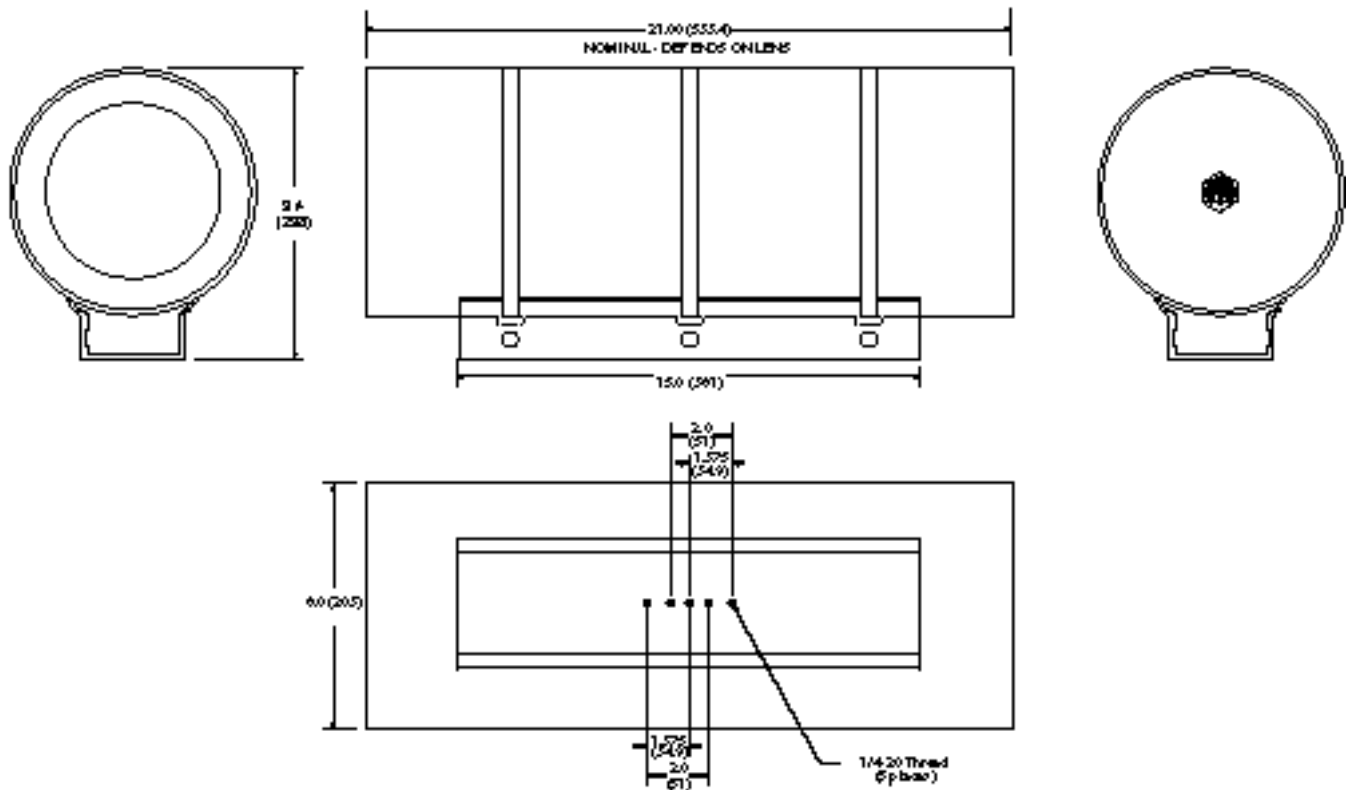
Dimensions, Model 2790 Camera (8-inch Housing)
